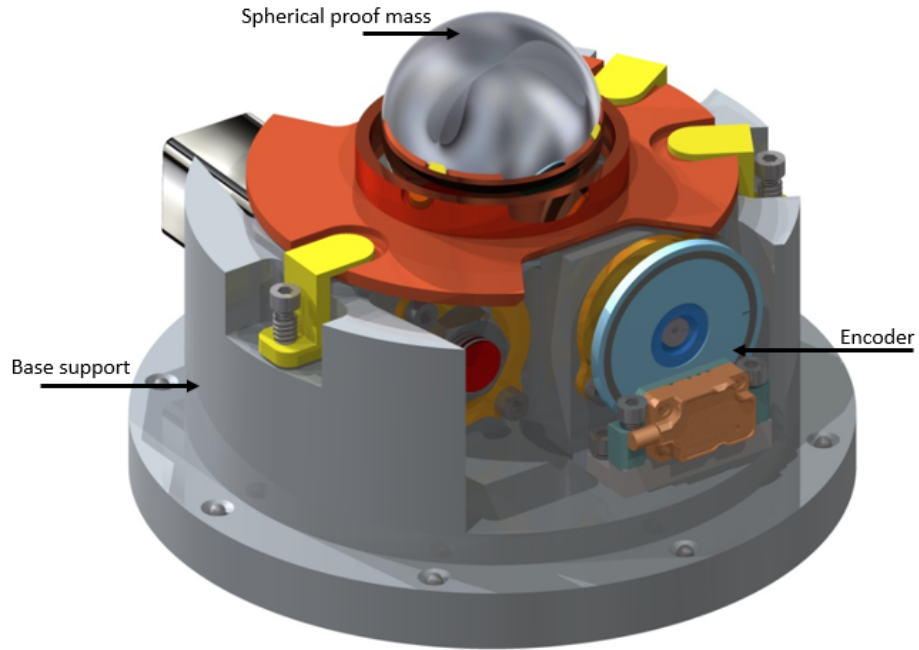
CAD rendering of the complete assembly design. ADAPTED [19]
